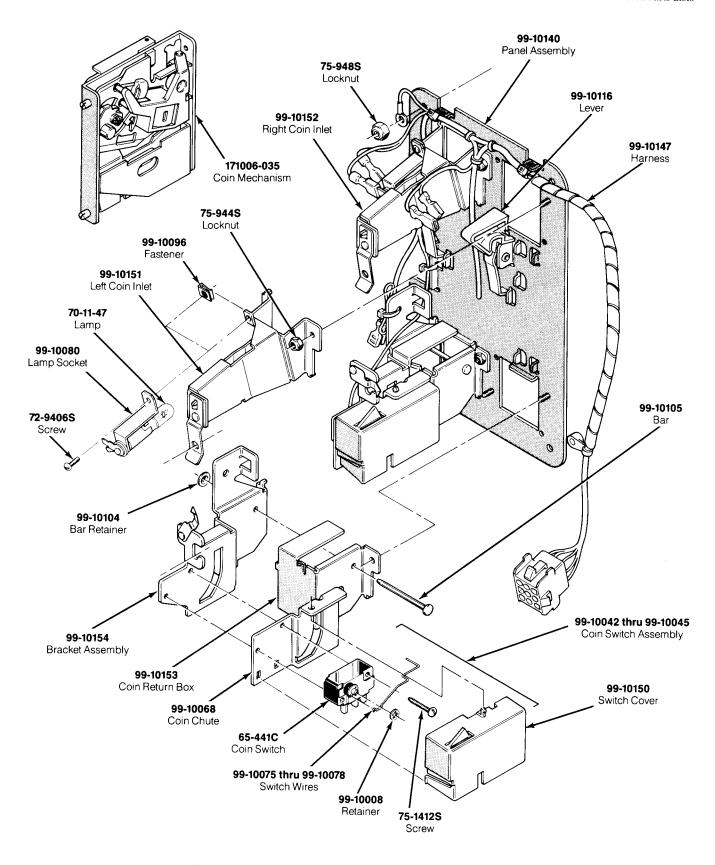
Coin Acceptors, Inc. Coin Door Assembly 171027-001 A
